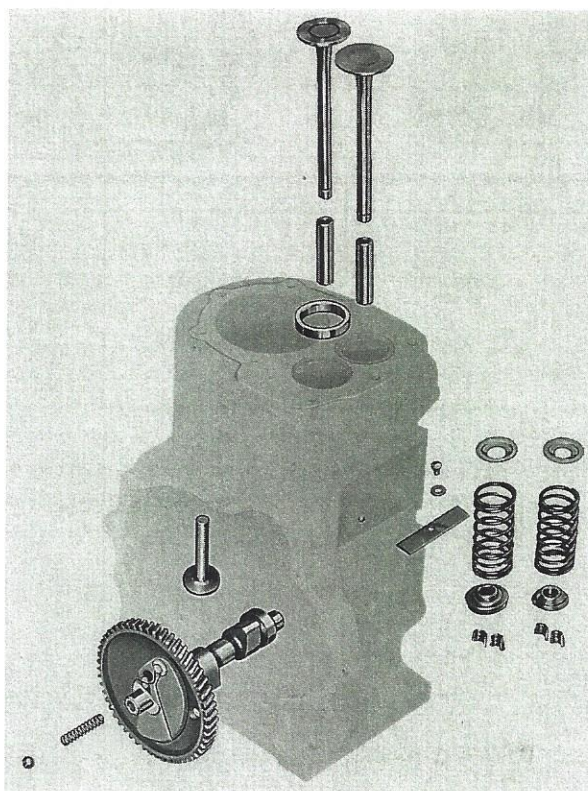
Valve parts and their positions relative to cylinder block and crankcase.
